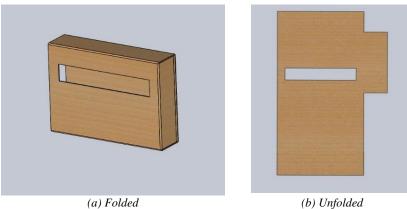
Matchbox Illuminator, Outer Sheath Folded and Unfolded Views.
